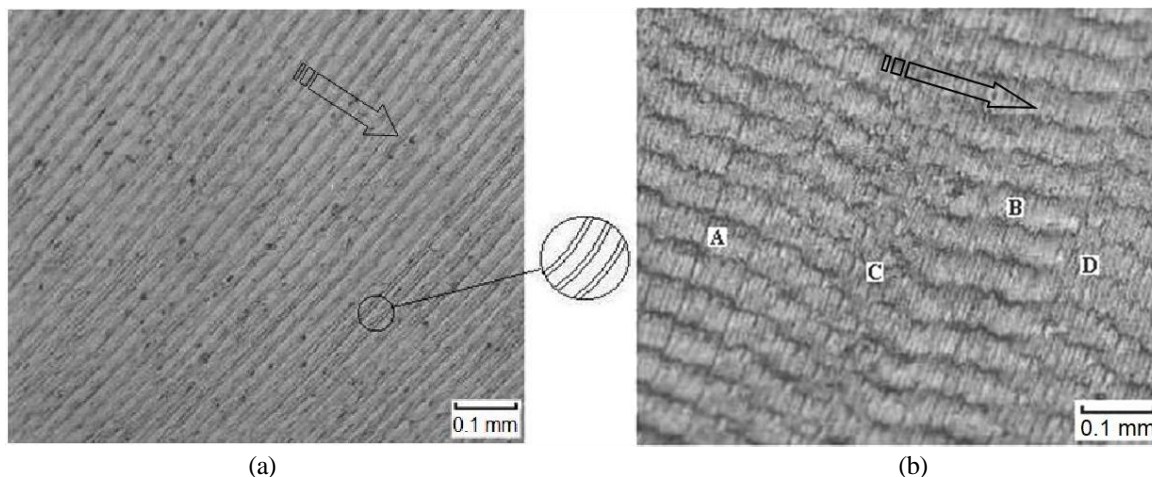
The condition of the workpiece surface after milling at the highest cutting condition which is $V_c = 95$ m/min and $f_z = 0.04$ mm/rev; (a) initial cut (b) final cut
